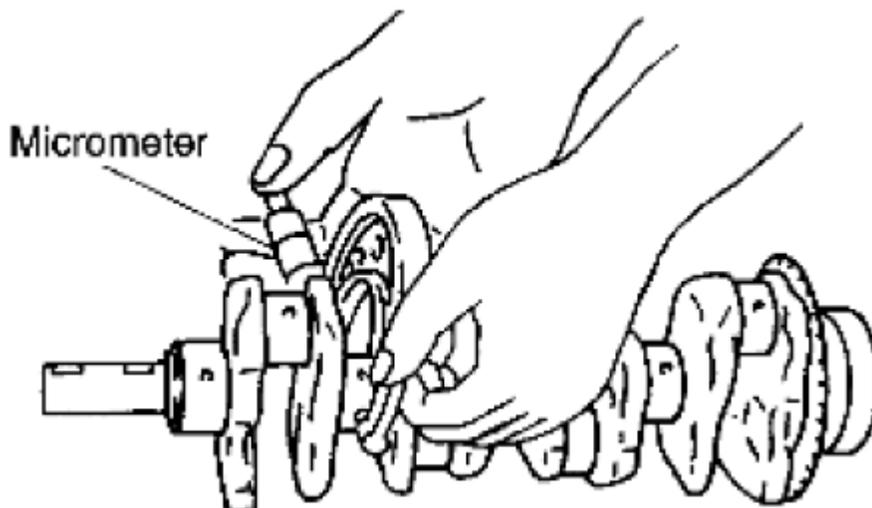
Measuring Outer Diameter Of Crankshaft Main Journal
